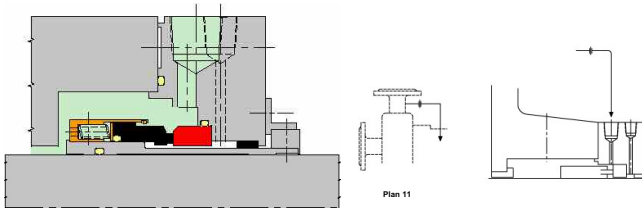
API Arrangement 1 plus Typical Piping Plan.
